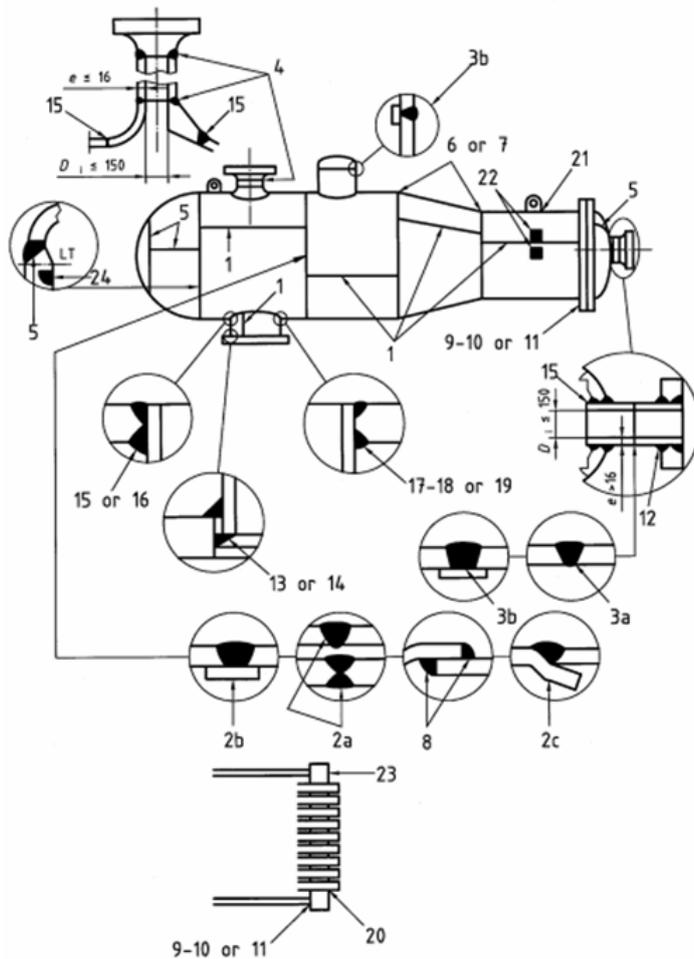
Figure 6.6.2-3 – Type of welds
